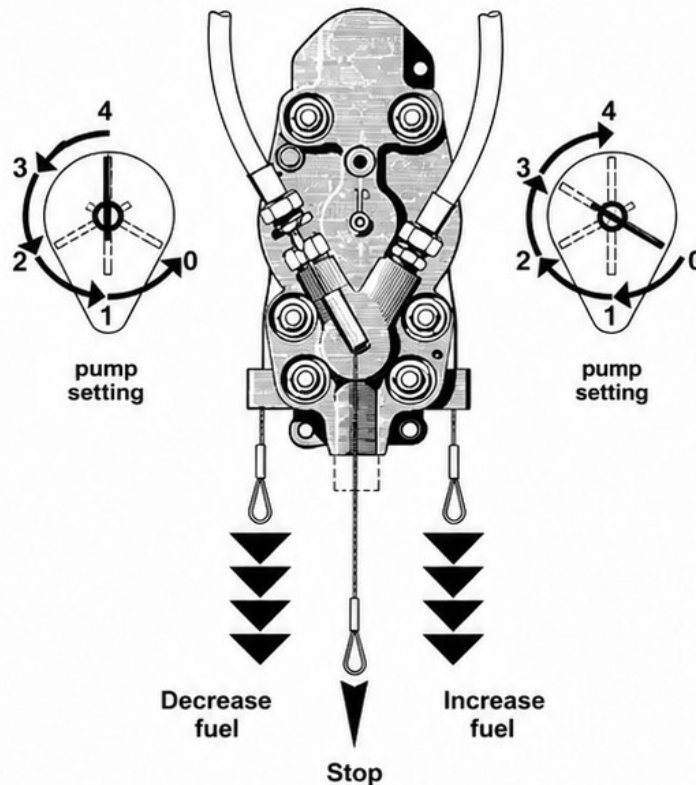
Adjusting Schematic Drawing of the Fuel Pump
